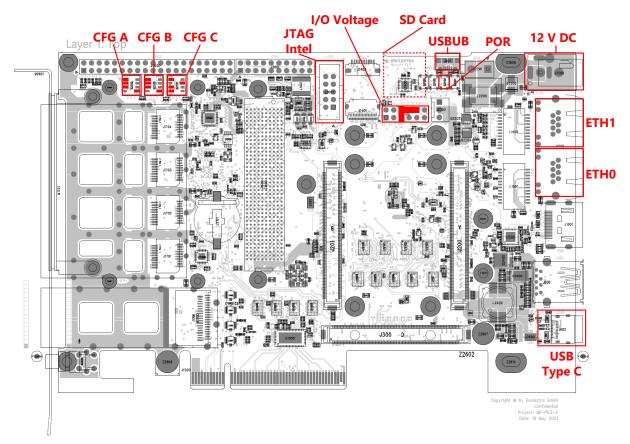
Mercury+ PE3 Base Board Assembly Drawing (Top View)
